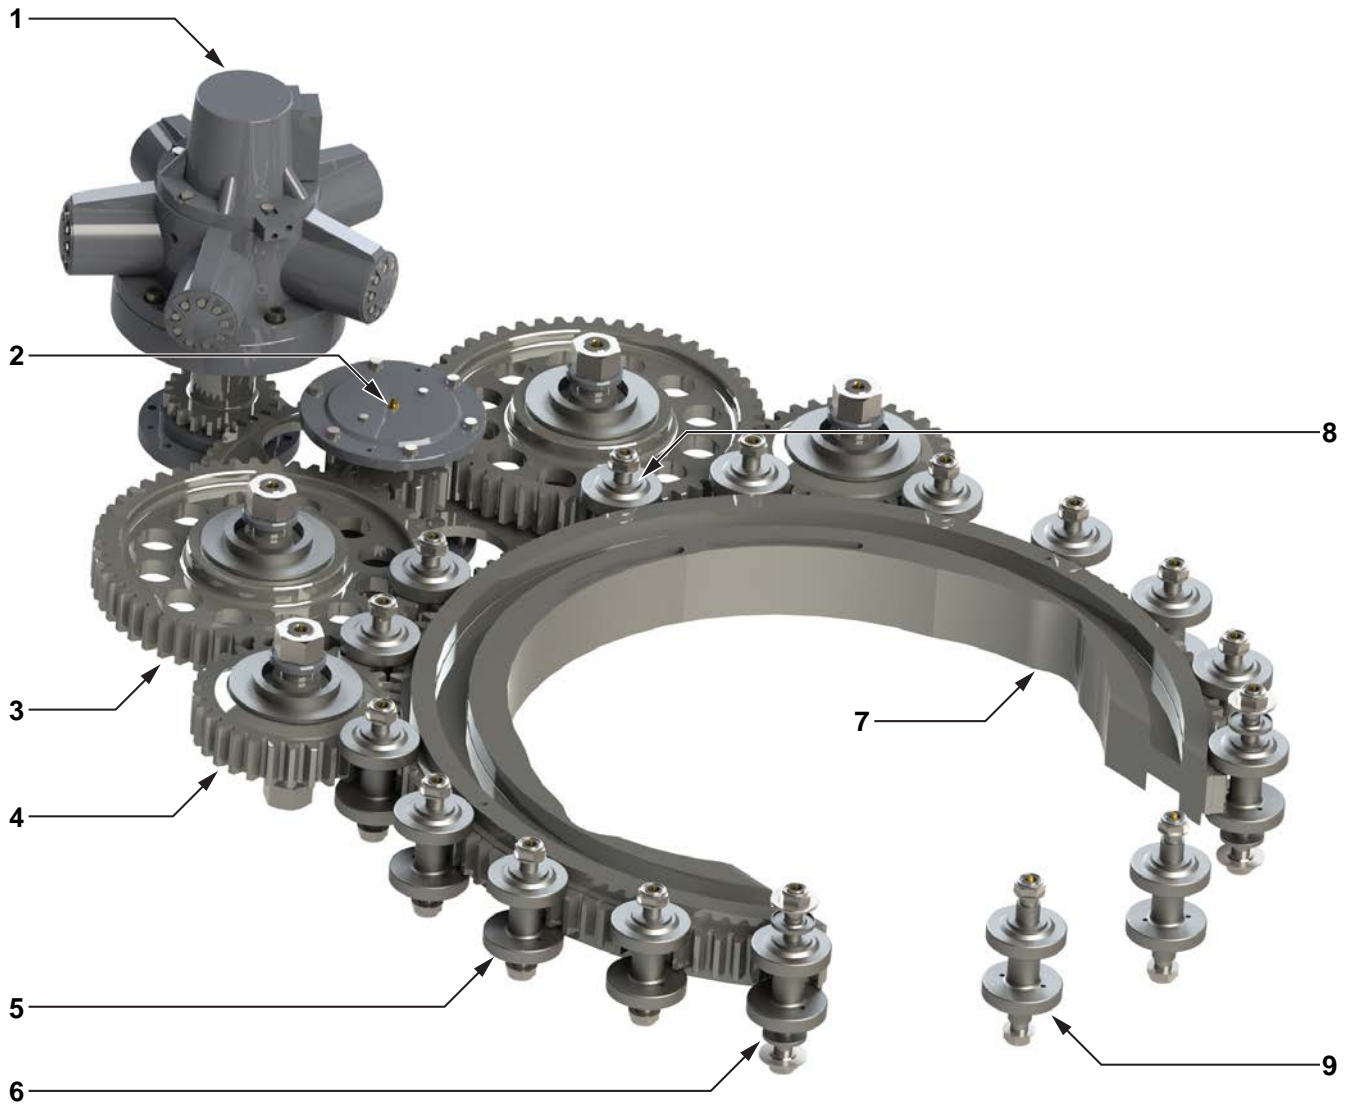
80-1402 HD31-80K Gear Train ISO View
